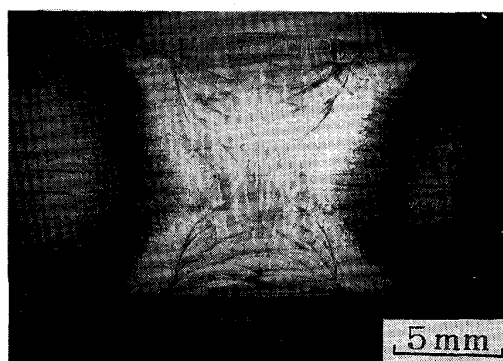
Macroscopic aspect of a Ti-15V-3Cr-3Sn-3Al alloy TIG weldment after aging at 873K for 3.6 ks.
